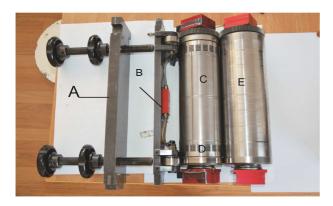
Main components of the stamping unit: A – pressure screws; B – pressure rollers; C – flexible die; D – magnetic cylinder; E – anvil.
